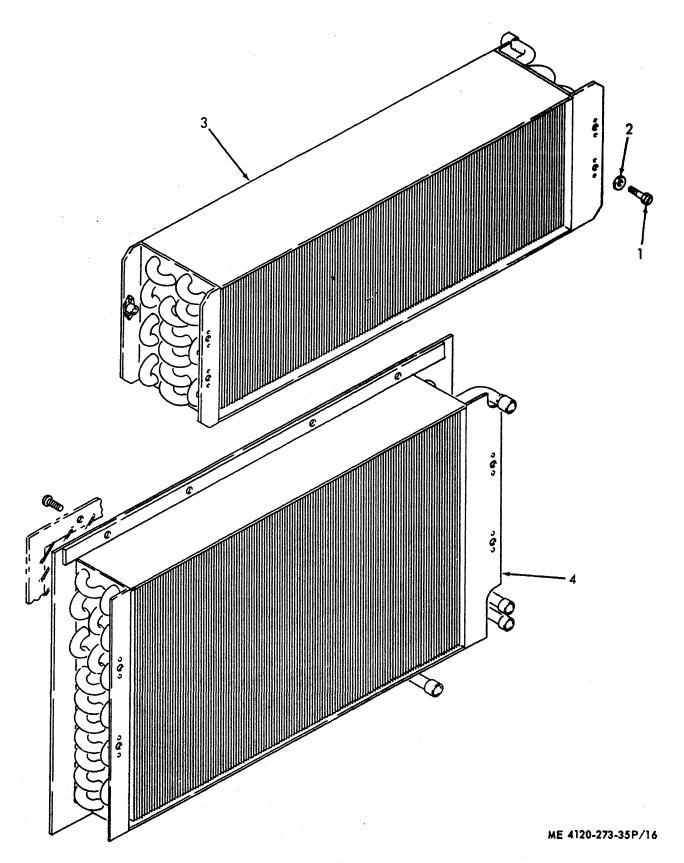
EVAPORATOR AND CONDENSER COILS AND MOUNTING
